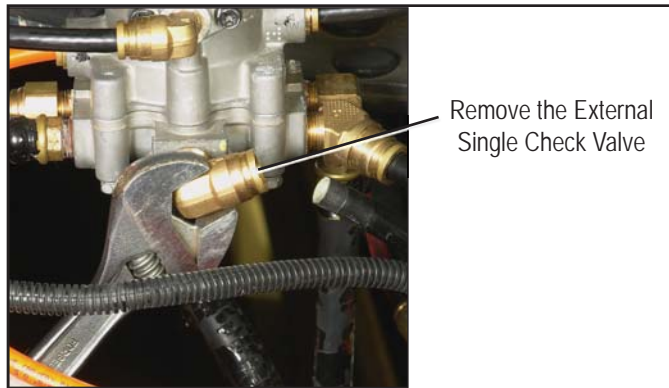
REMOVING THE EXTERNAL SINGLE CHECK VALVE
